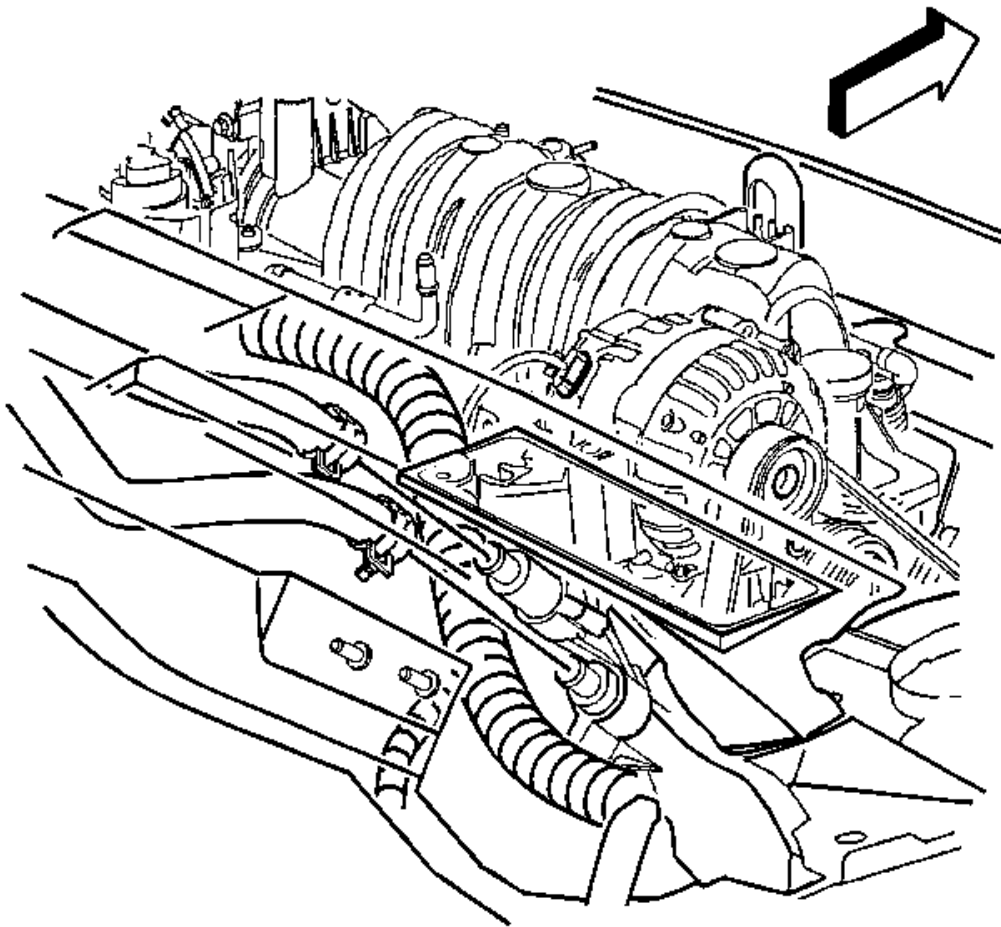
View Of Heater Hoses At Engine Heater Pipe Adapters
